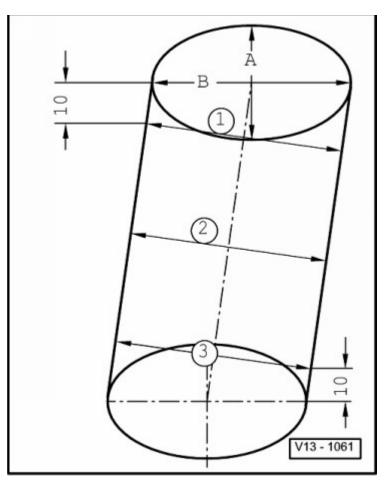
Checking Cylinder Bore Courtesy of AUDI OF AMERICA, LLC
